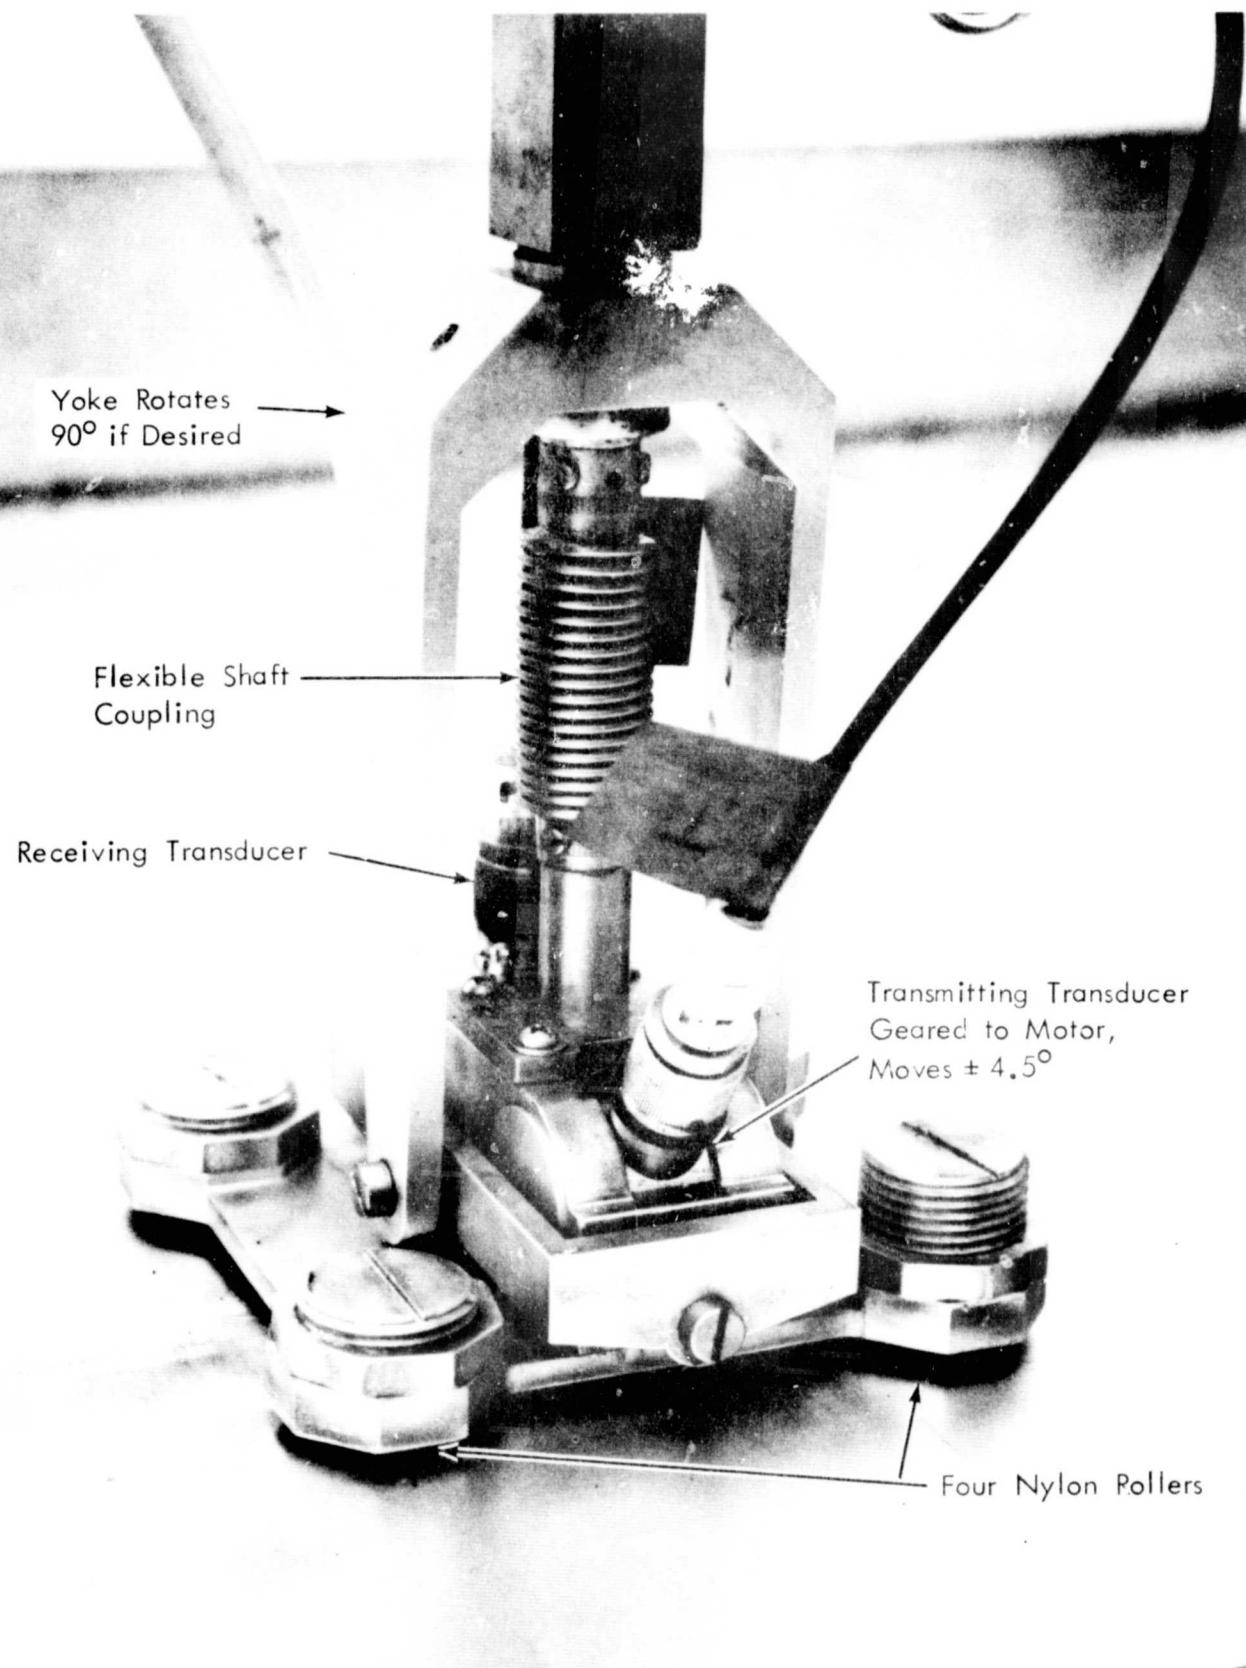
Picture of Ultrasonic Delta-Scan Transducer Assembly
